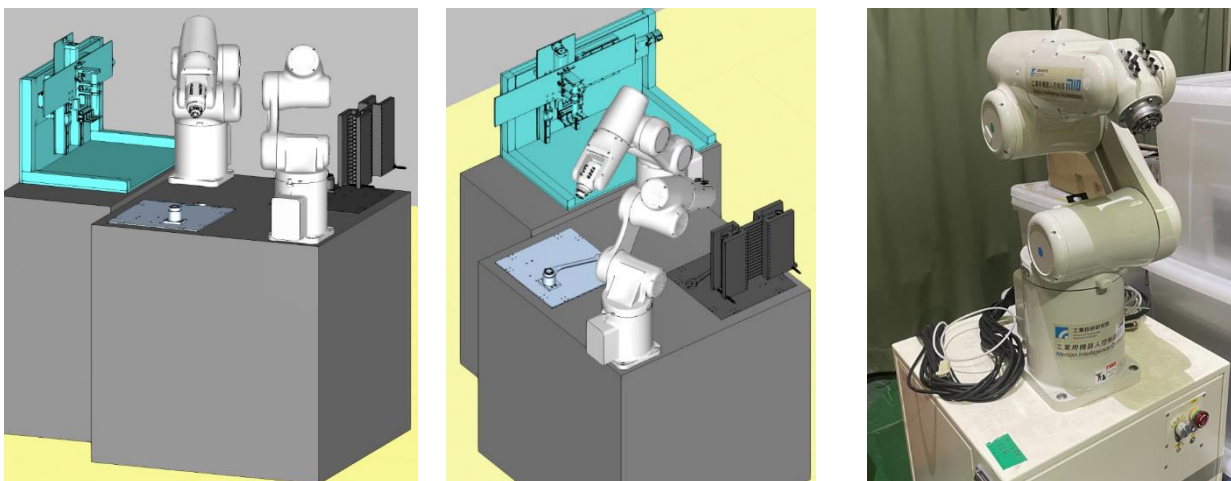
3D layout (left) and the AR605 (right) of the demonstrator
